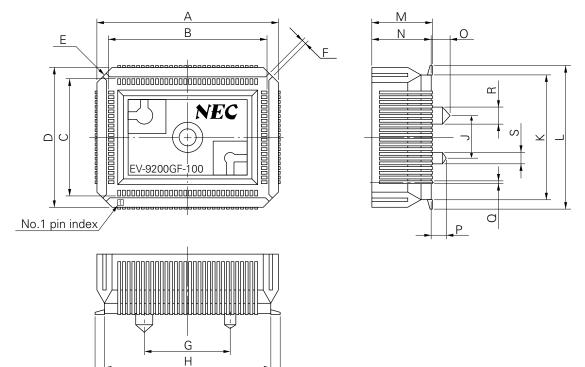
EV-9200GF-100 Drawing (For Reference Only)
